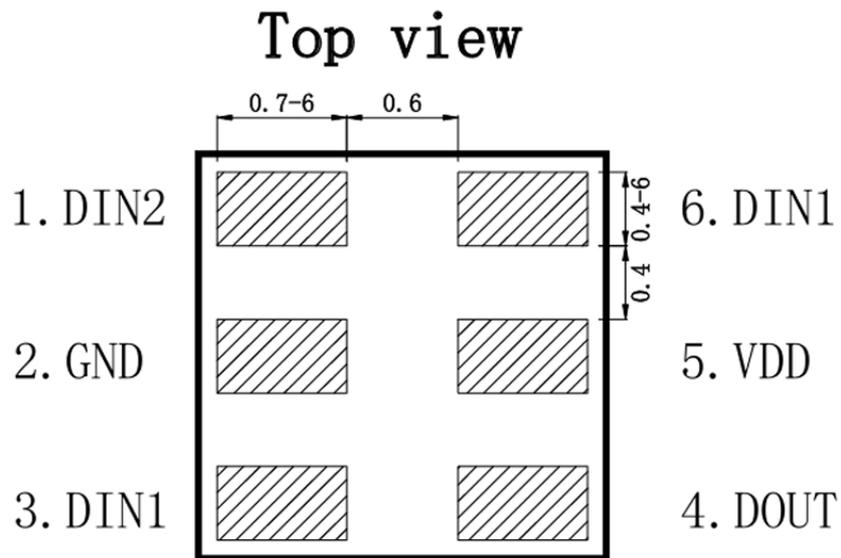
IN-PI20FTBT5R5G5B Package Outline Dimensions
